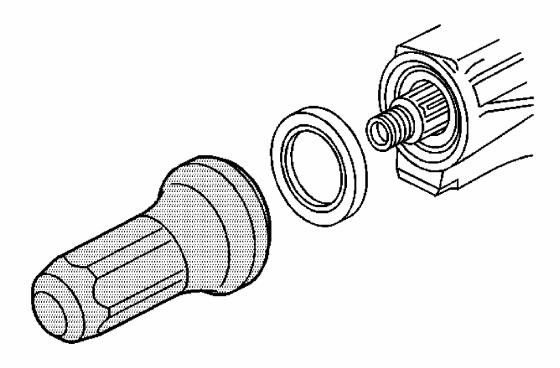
Installing Pinion Oil Seal Courtesy of GENERAL MOTORS CORP.
